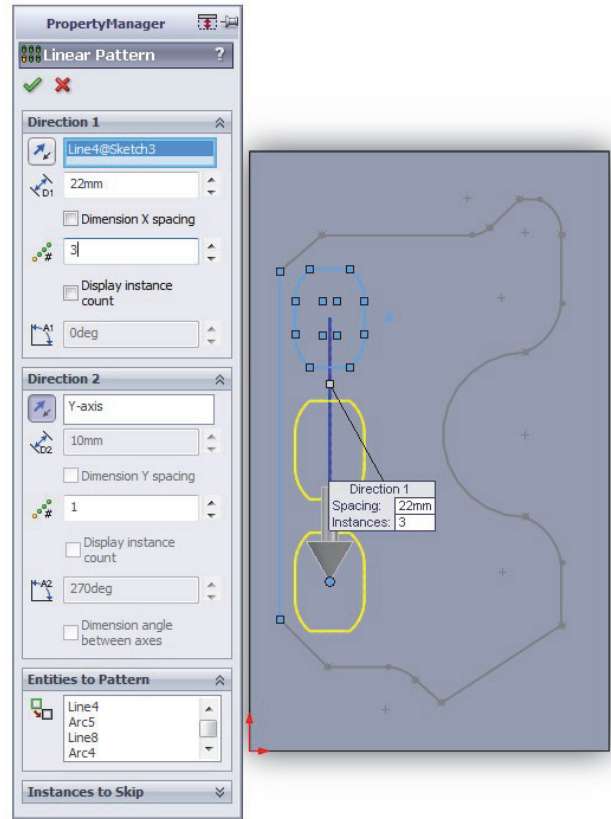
Linear Sketch Pattern tool for duplicating sketches down or across a linear path
